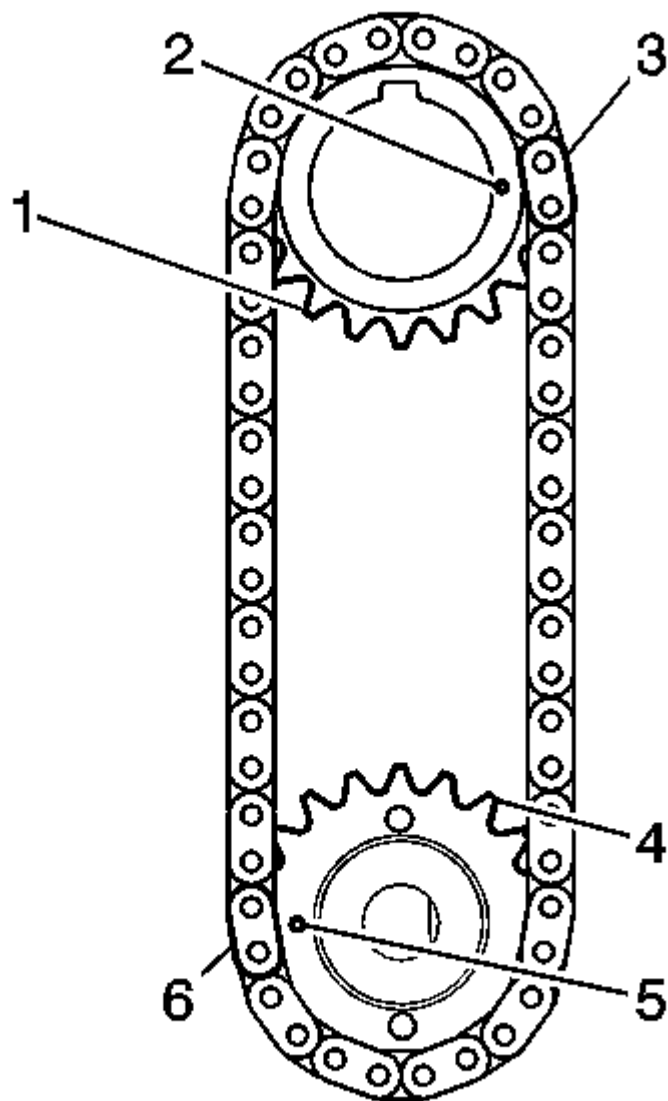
Aligning Link Marks With Timing Marks Of Each Gear
